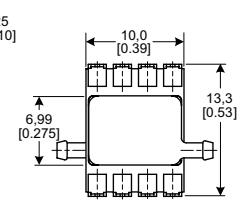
DIP Package Dimensional Drawings (For reference only: mm [in])
